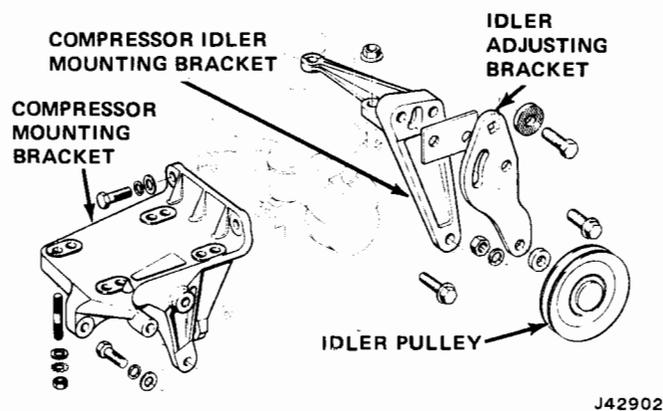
A-10 Compressor Mounting—Six-Cylinder
